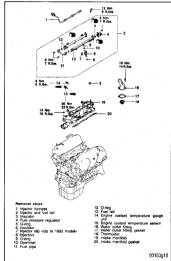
Exploded view of the intake manifold mounting—3.0L SOHC engine
